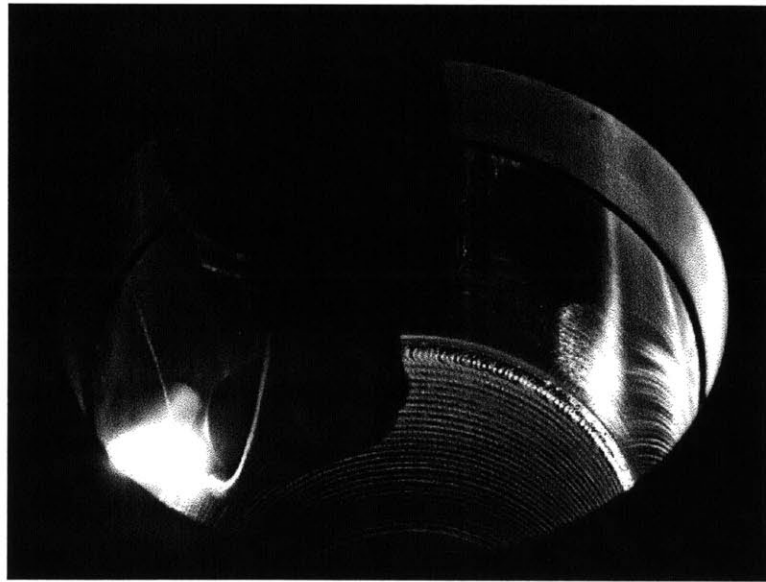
Fe-12Cr-2Si being weld overlaid onto the inner diameter of F91 by gas tungsten arc welding (GTAW) [3].
